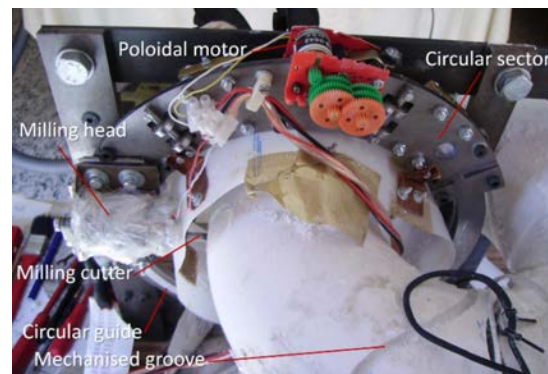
Picture of a detail of the toroidal milling machine.
